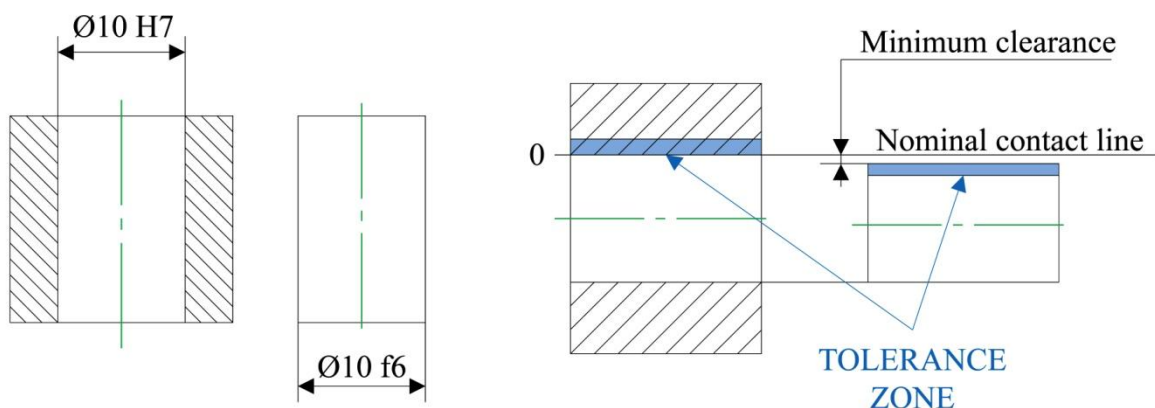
Example of geometrical specification for a hole/shaft clearance fitting according to ISO 286-1.
